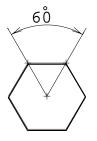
Shows the angle size for a single surface on the hexagonal bolt head on the adjusting screw.
